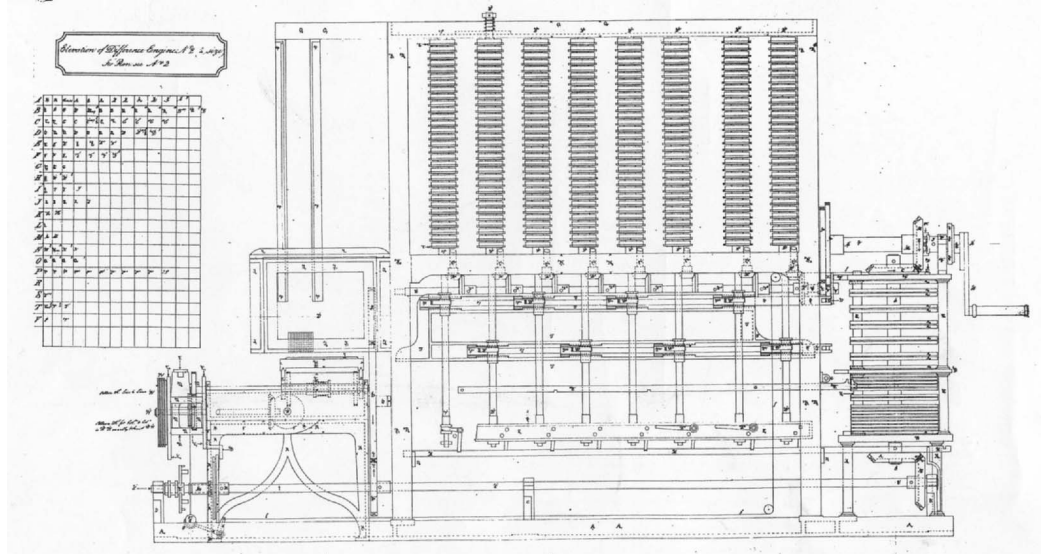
Design drawing. Main elevation showing crank handle (right), calculating section (center), and output apparatus (left). Science Museum Library Babbage Papers, drawing BAB [A] 163, "Elevation for Difference Engine No. 2." (Drawing courtesy of the Science Museum, London.)
